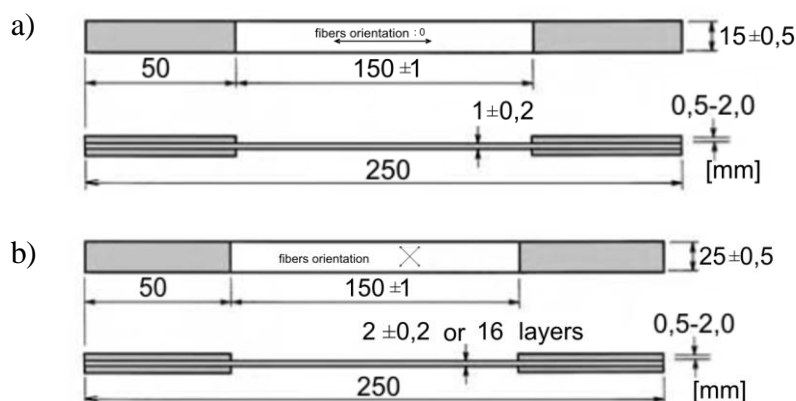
Specimens geometry and dimensions for static and fatigue tests with layers sequence of [0]₄ (a) and [± 45]₄ (b)
